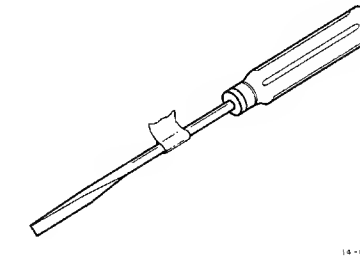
Tape Flag for Counting Screwdriver Turns
